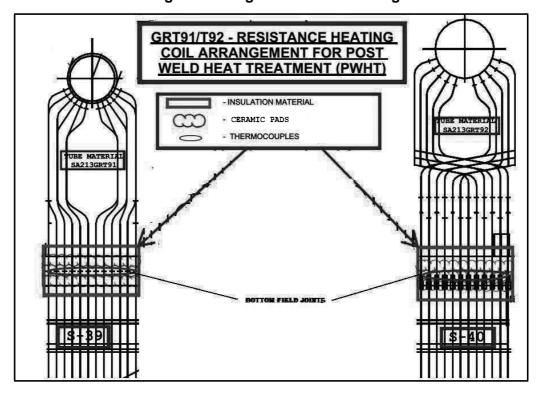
Resistance heating Coil arrangement for PWHT of T91/T92 tube assembly
